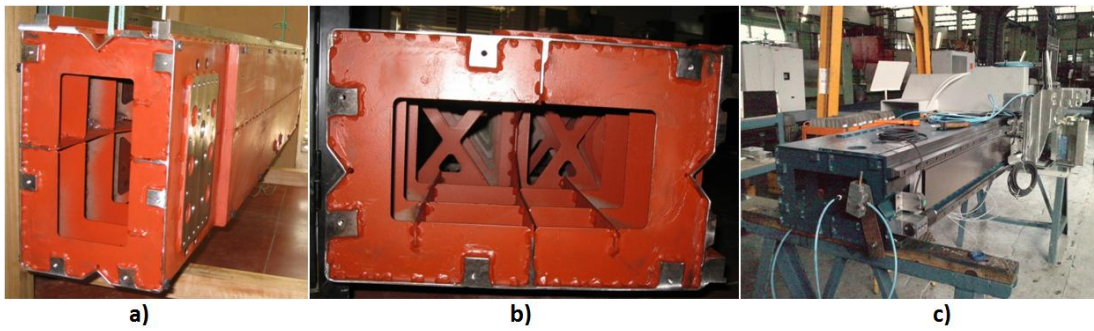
Details of the construction of the currently used steel beam. a) Detail of installation station where the linear motors are assembled. b) Cross section of the beam and its inner ribs. c) Installation of components in the beam
